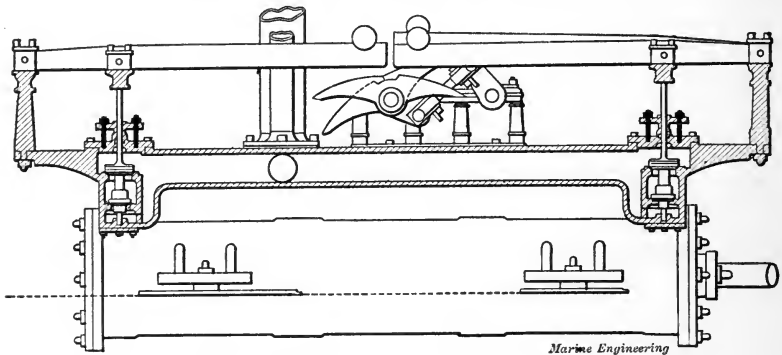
Western River Engine, Elevation and Section through Valve Chests.
